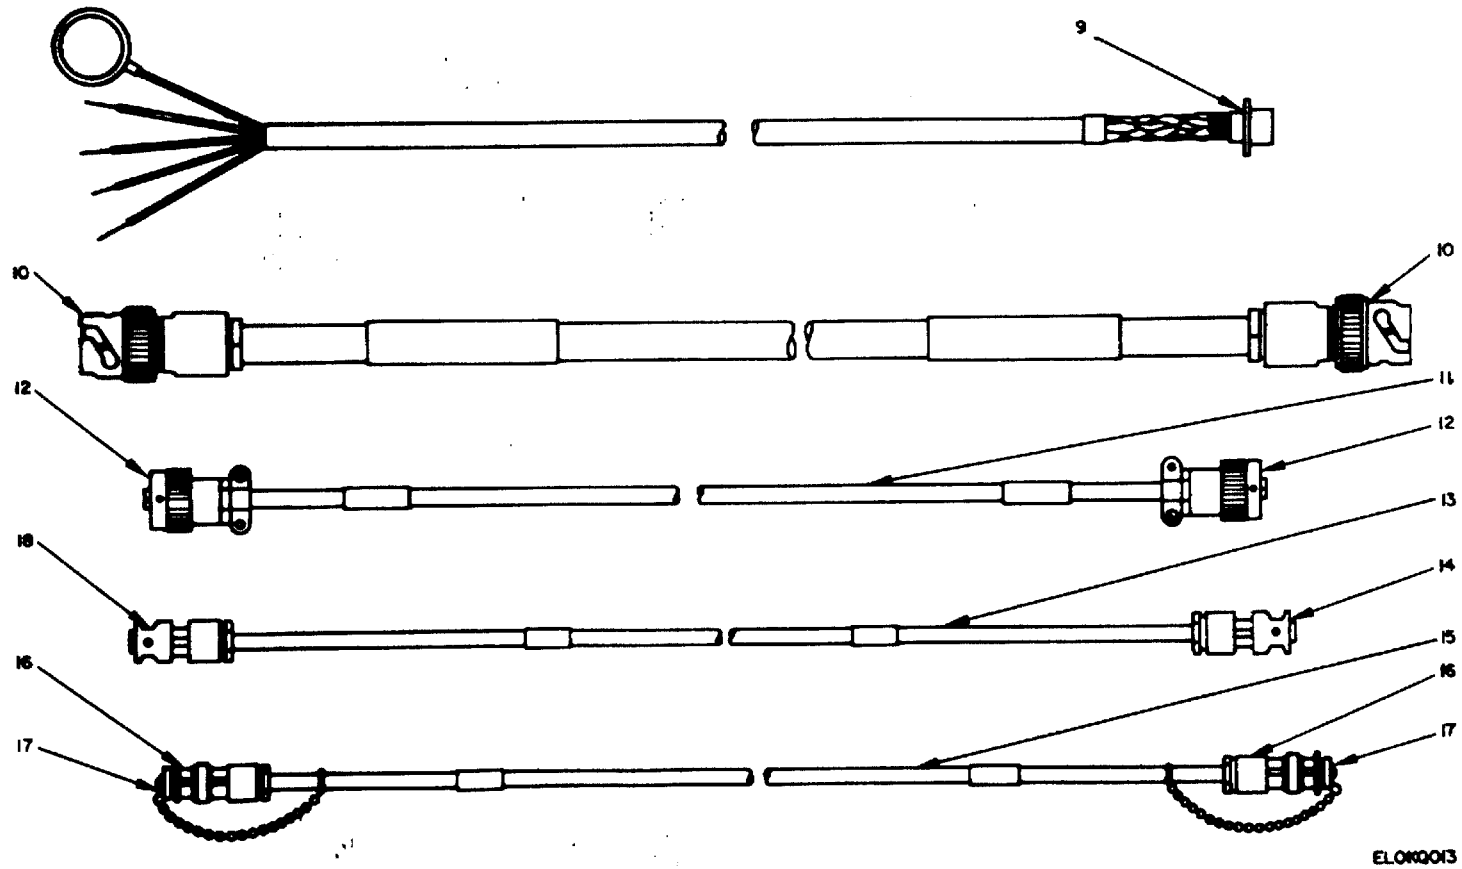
Shelter, Electrical Equipment S-412/TCC-72, Cable Assemblies (Sheet 1 of 2).
